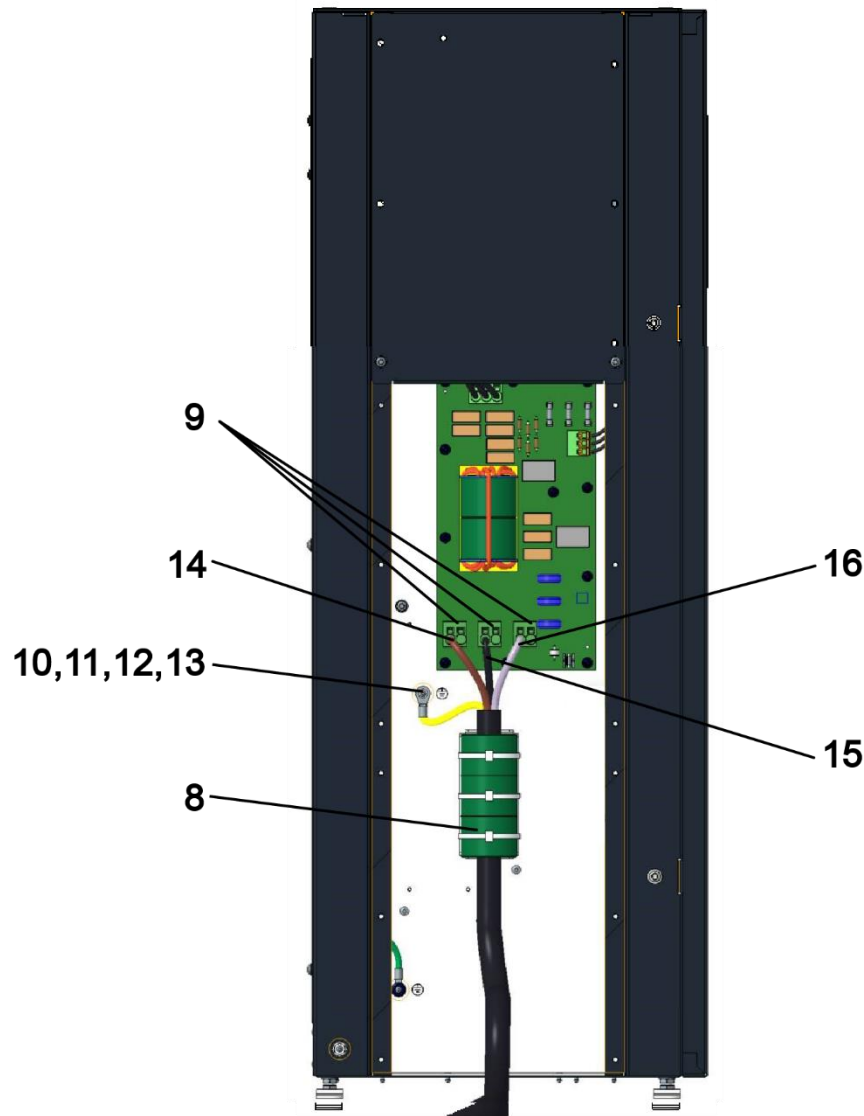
Feeding the Cable through Cable Gland (view without Covers)
